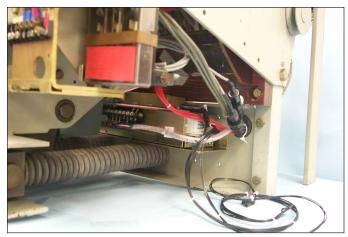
Aux. CT Module Assembly Installed in the Breaker.
